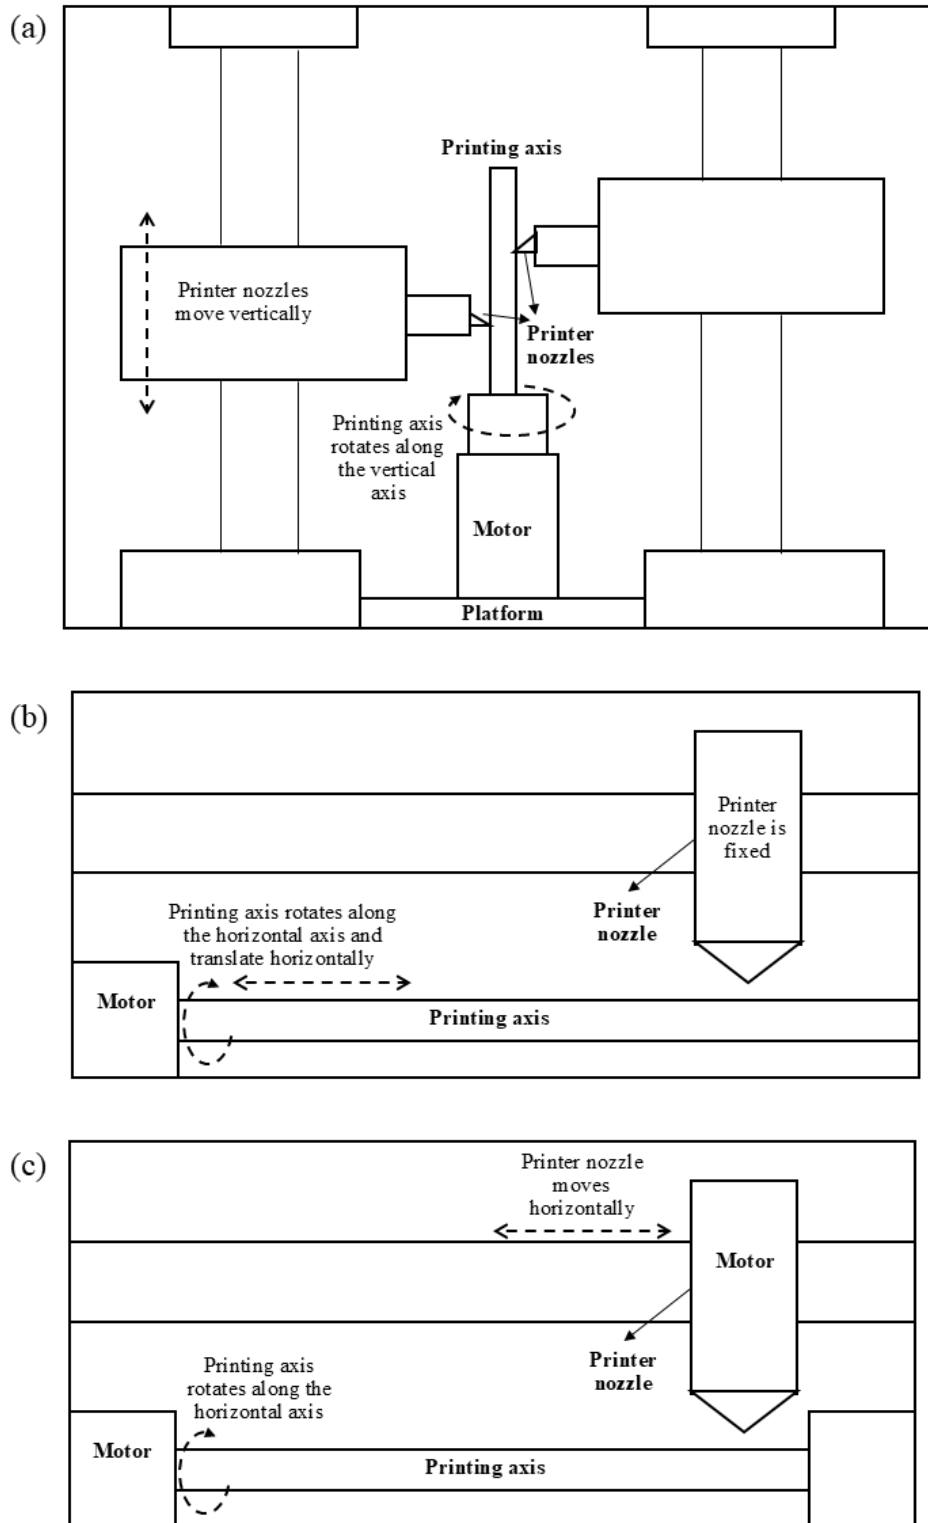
Printing axis design concepts: (a) Design 1, (b) Design 2, and (c) Design 3
